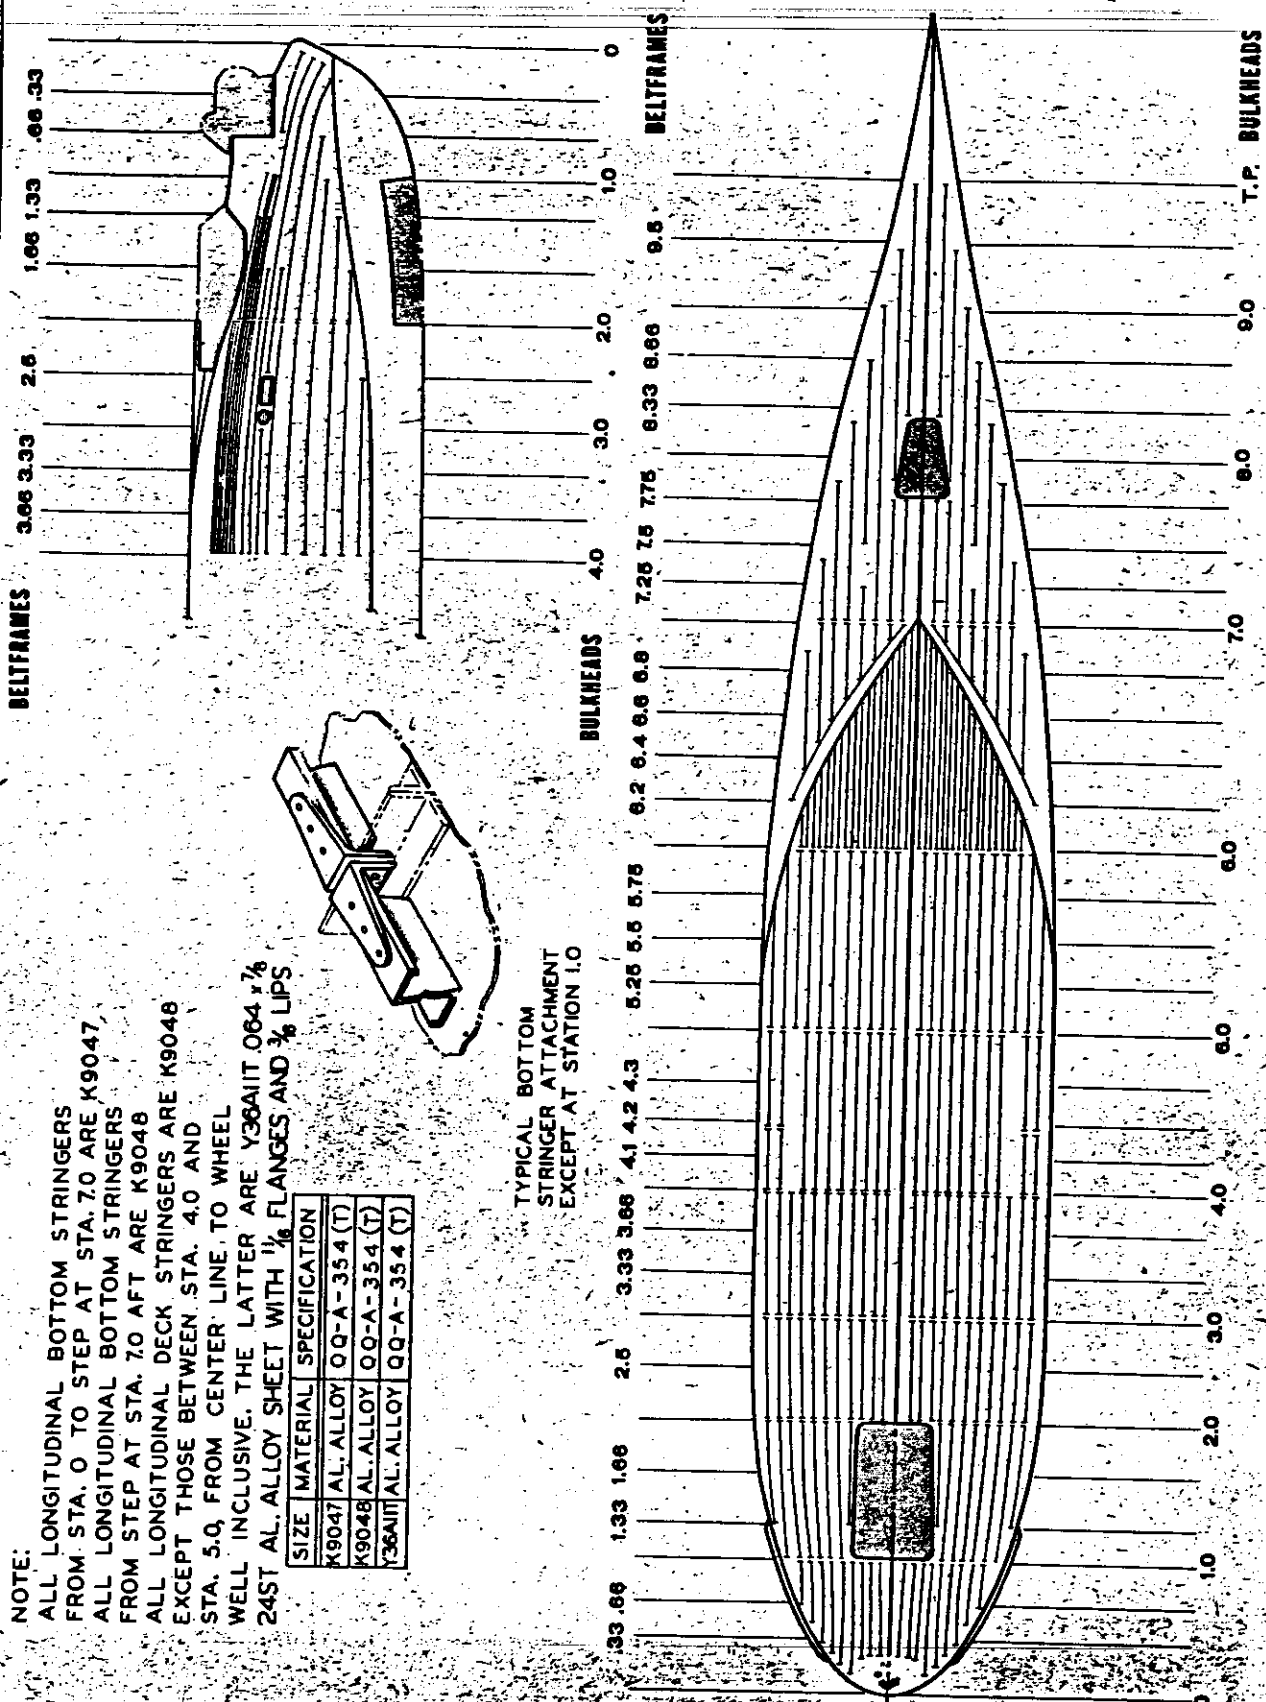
Hull Stringer Diagram (sheet 2 of 2)
